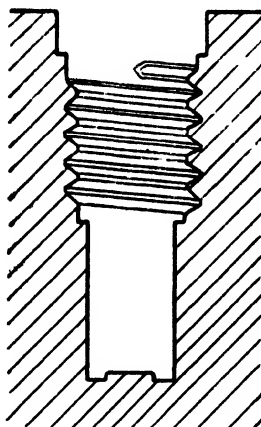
Design of internal thread which provides for wear and rounding of thread plug.
